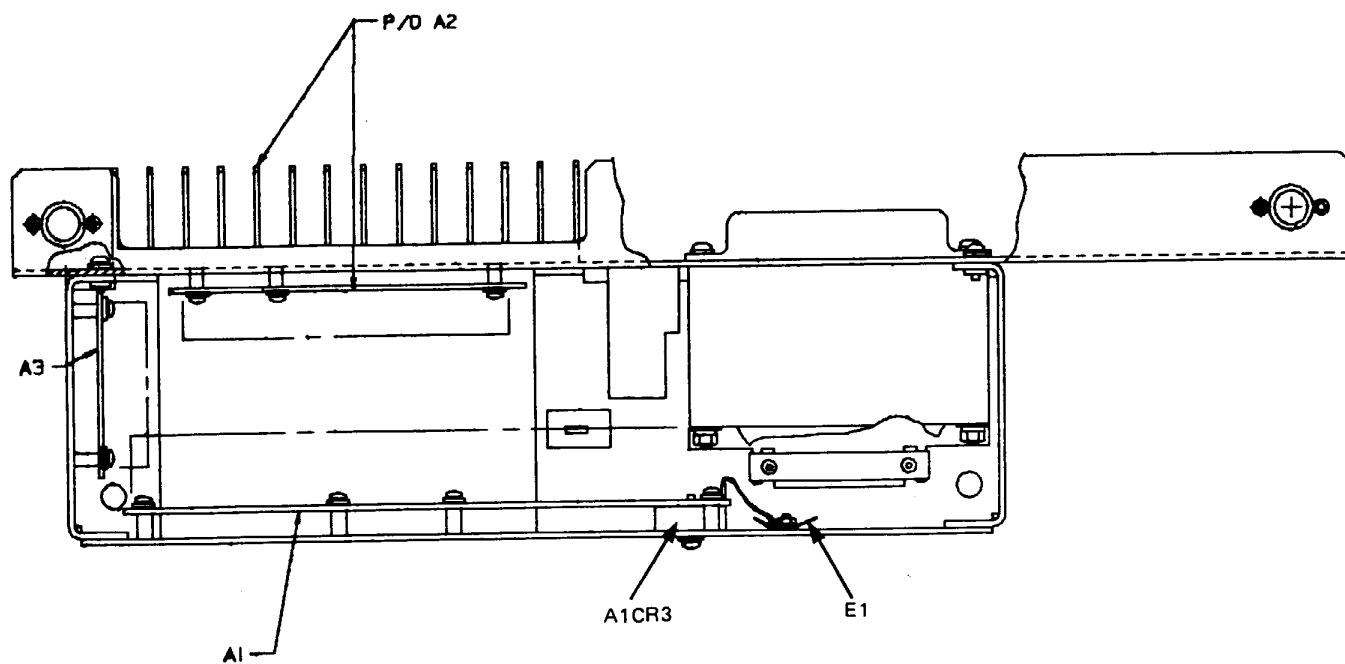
Power Supply Assembly A15 Component Location Diagram (10073-3000, Rev. G)
